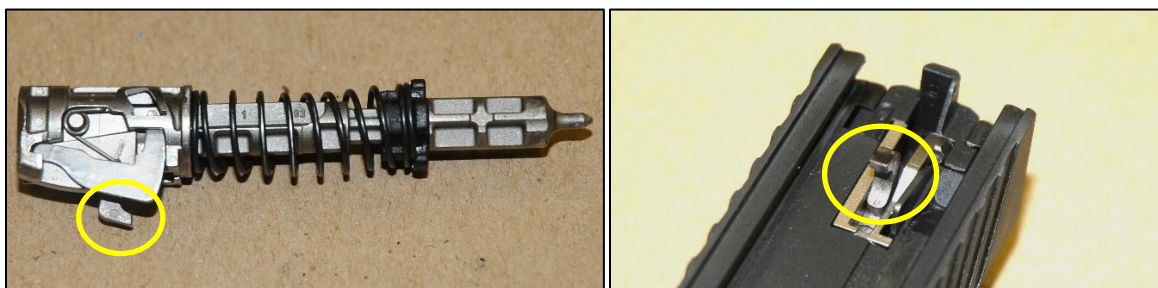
Striker assembly with striker foot circled (left), striker assembly in the slide assembly (right)
